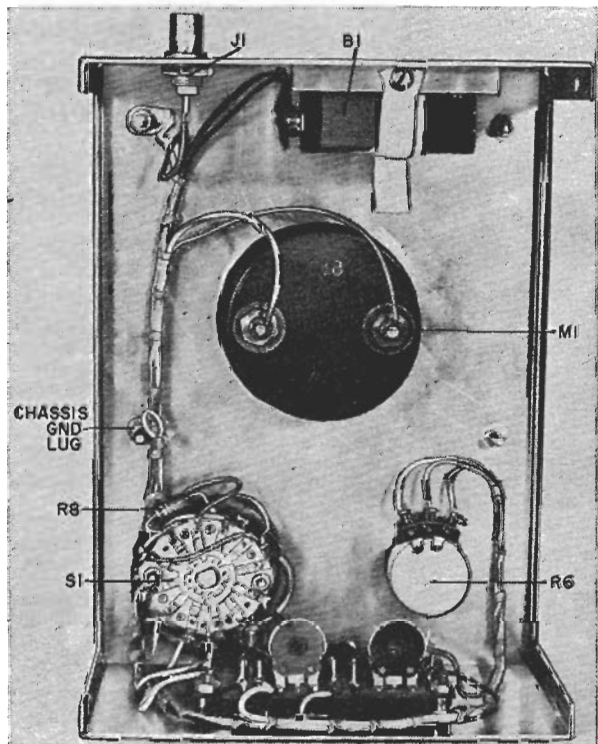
After components and circuit board are mounted in their respective locations on the metal box, wire them together. To obtain a neat, professional appearance, use lacing cord to bundle the wires into harness configuration as shown in this photo.
